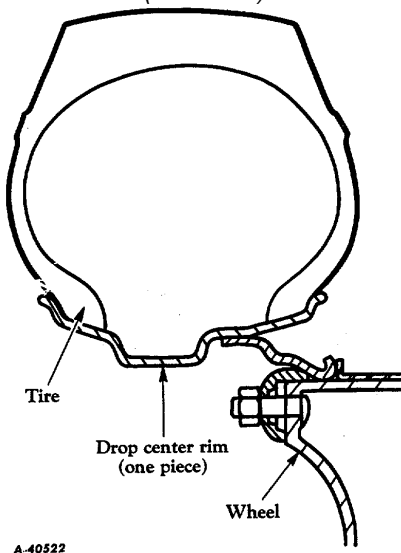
Drop Center Type Disc Wheel (Tubeless)
